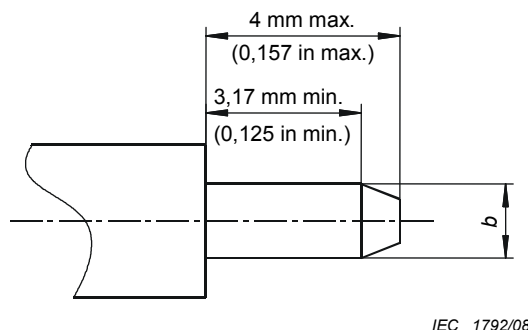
Gauge pin for socket-centre contact (for dimensions, see Table 4)
